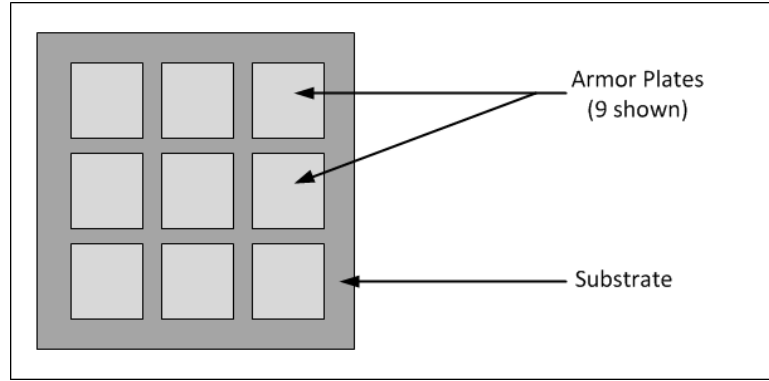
Example layout of flexible plated armor showing armor plates adhered to a flexible substrate (top view shown).
